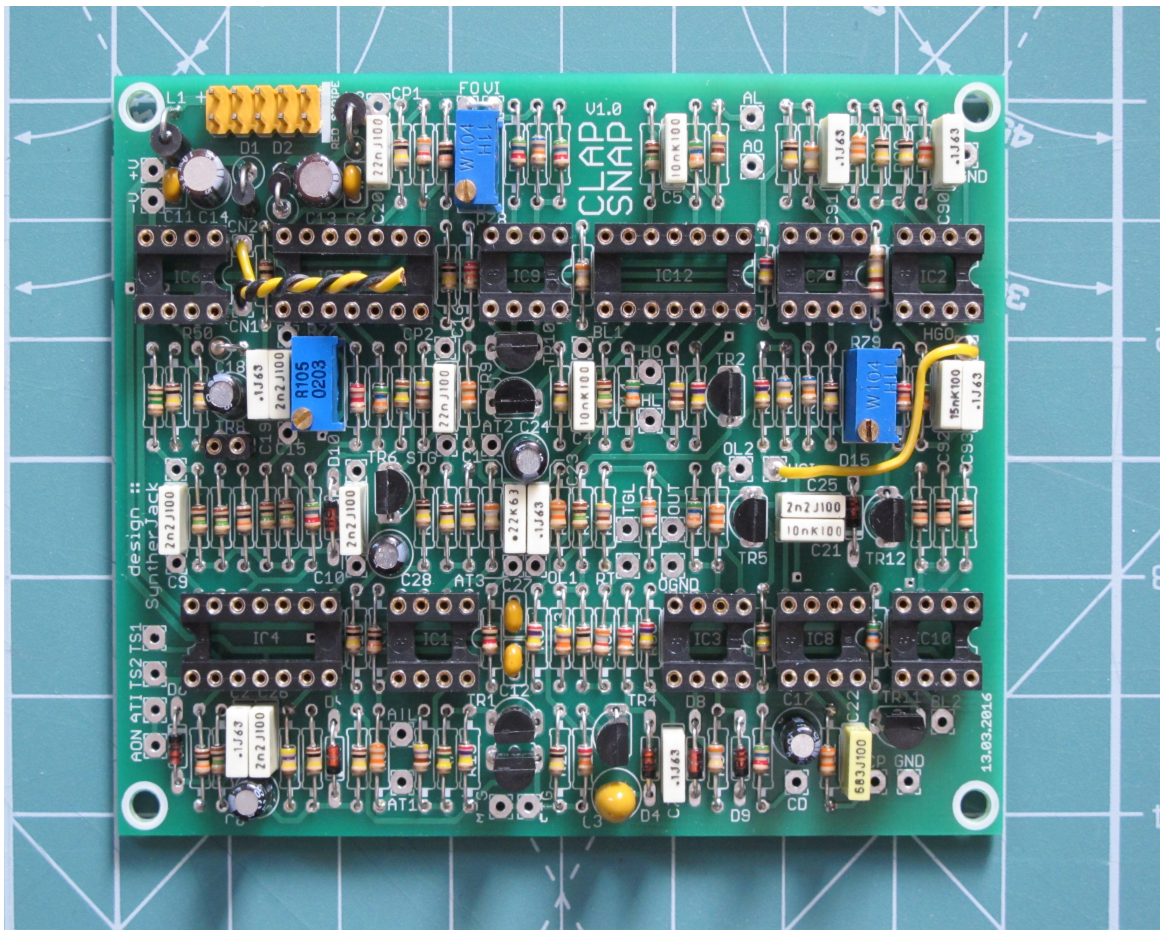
Soldered ClapSnap PCB, final version 1.0
